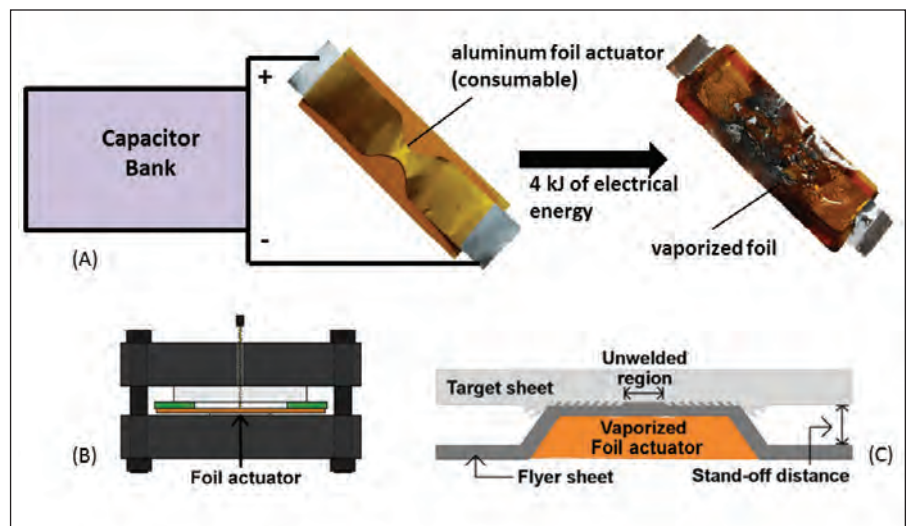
Schematics of the VFAW process. A — Before and after experiment conditions of the foil actuator; B — stackup of a typical VFAW assembly; C — closeup of the welding operation.
